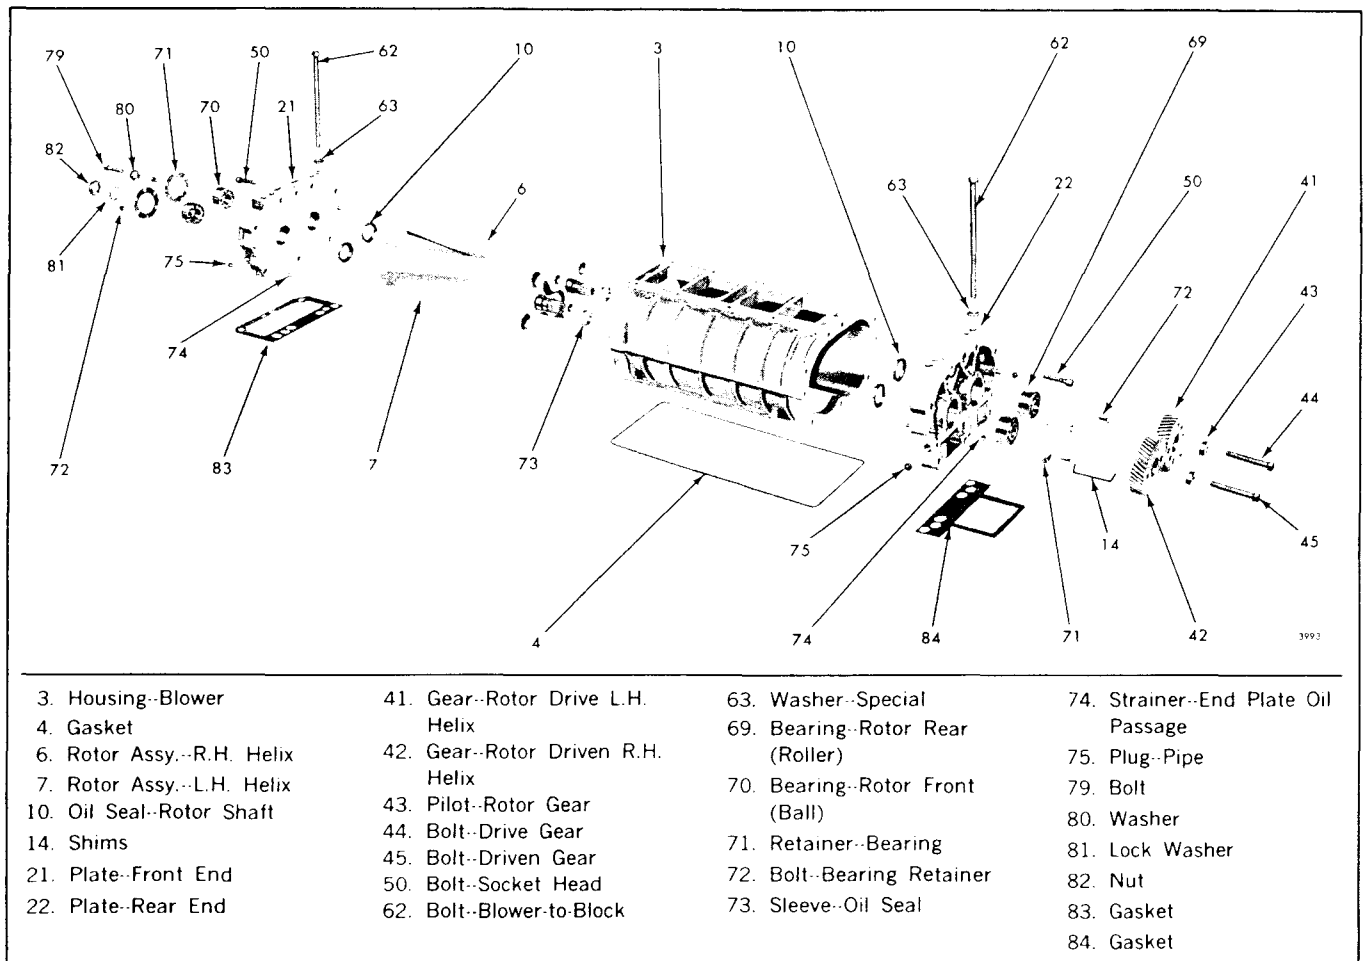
Blower Details and Relative Location of Parts (8V-53) (Former Blower)
